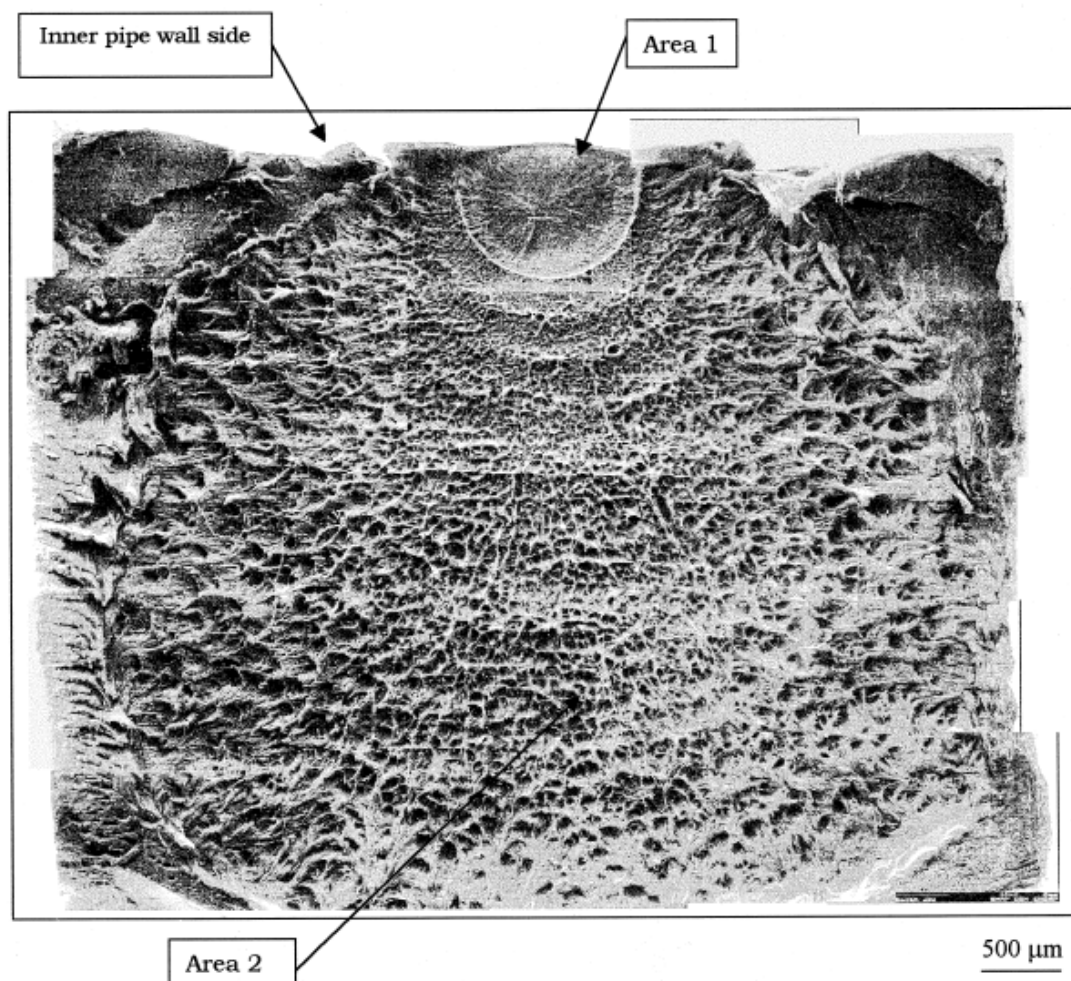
Brittle fracture surface: gas pipe creep failure (9.6 bar) at 80°C [104]
